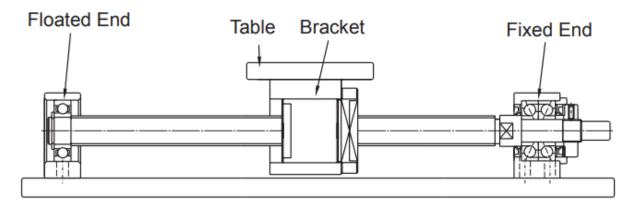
Bearing Block attached to Ball Screw and Sitting over Linear Guide Rails [27]
